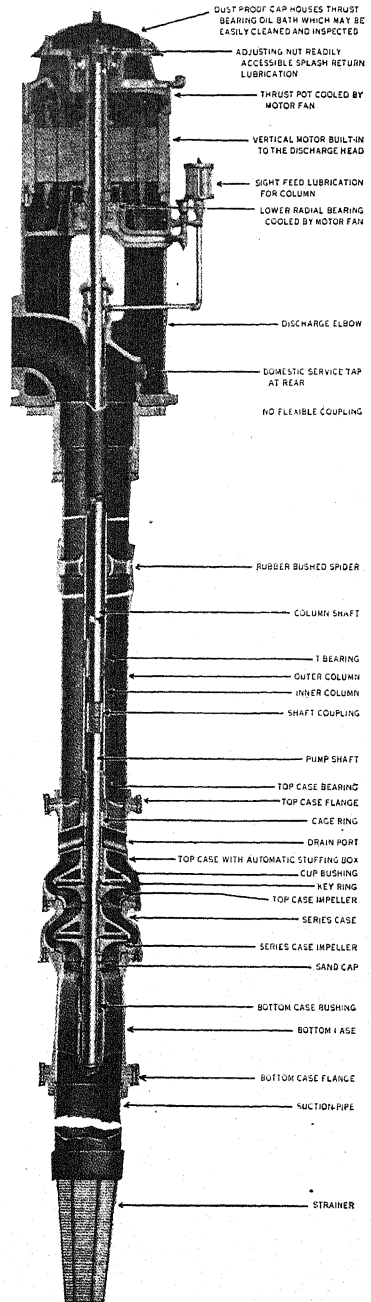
Cutaway section of two-stage Byron Jackson deep well turbine pump and motor showing details of parts. (Courtesy: Byron Jackson Company.)
